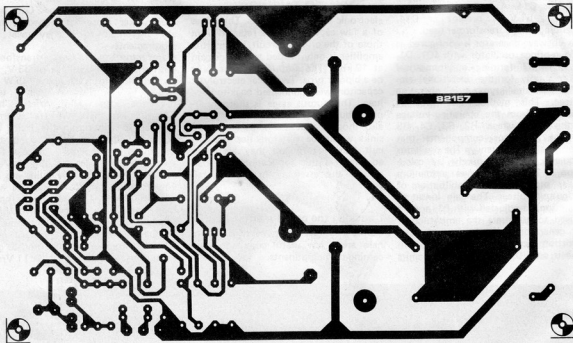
The printed circuit board for the power generator. All components are mounted on the board except for the mains transformer, fuse and mains switch. Since the output transistors are mounted on the printed circuit board with heatsinks (see text), the cover of the housing must allow sufficient ventilation.
